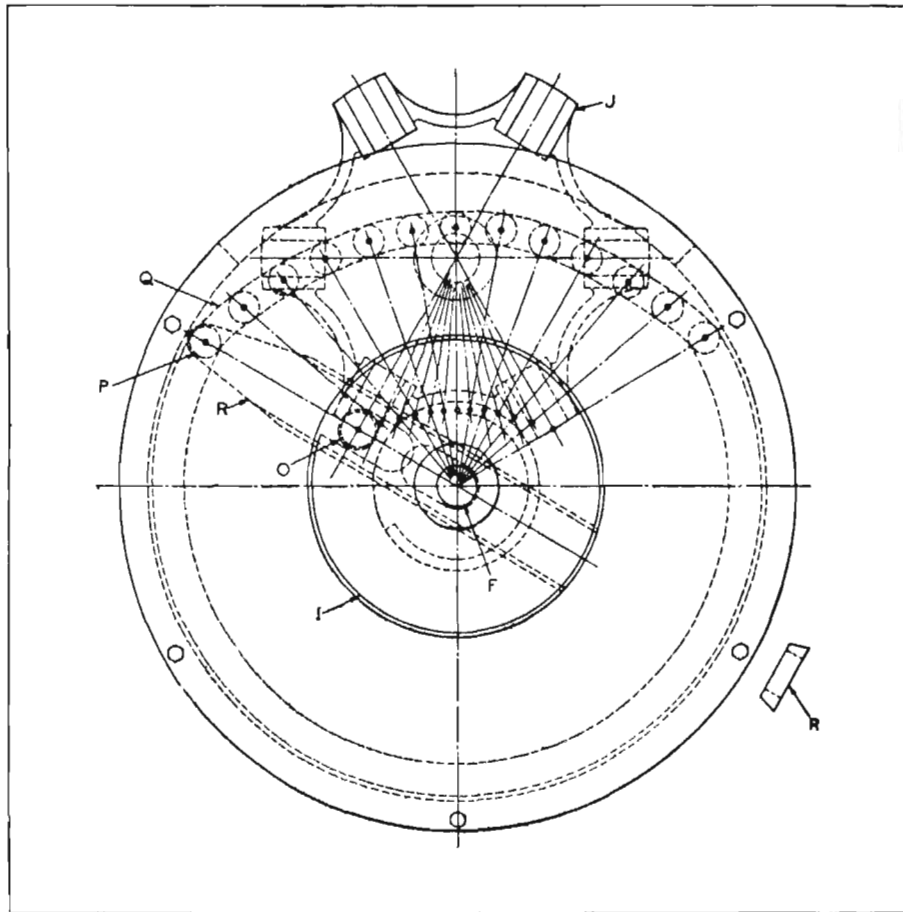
End View of Geneva Motion Mechanism Shown in Fig. 15. Geneva Dial *J* has Six Stations.
